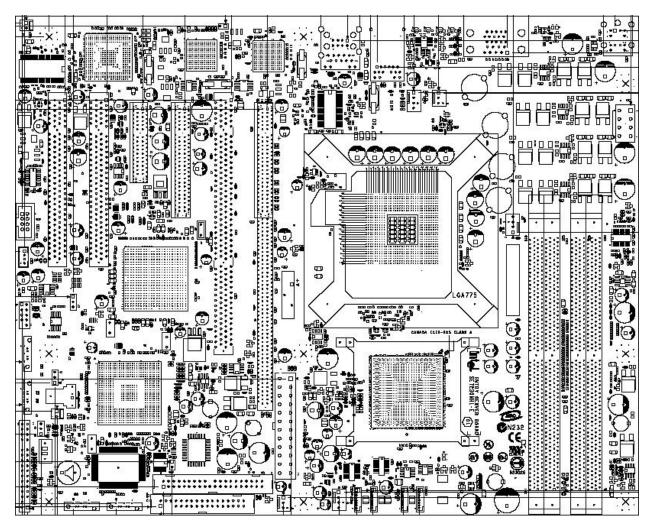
Intel<sup>®</sup> Server Board S3200SH Mechanical Drawing (TBD)
